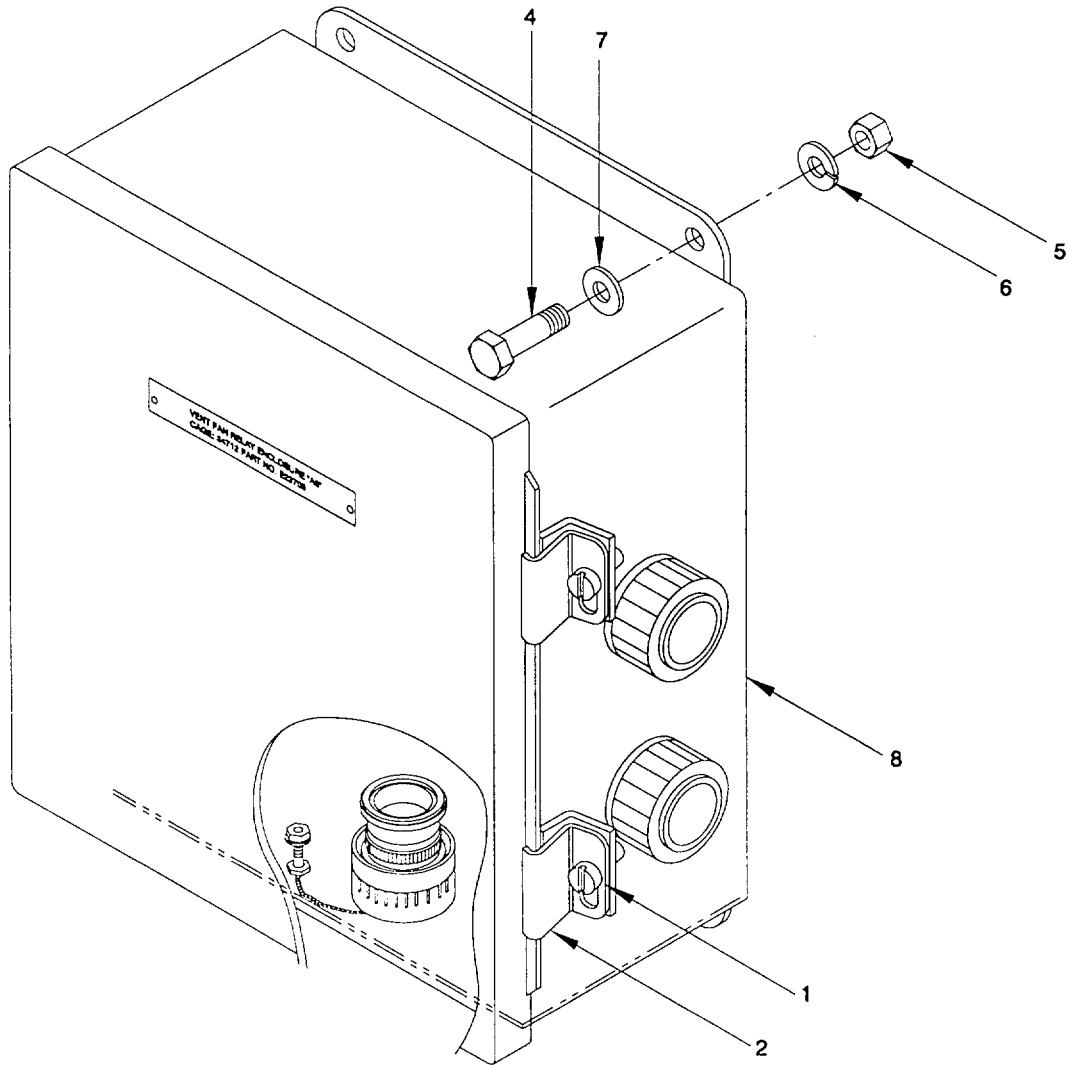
Vent Fan Relay Enclosure Assembly "A8", Remove/Install
